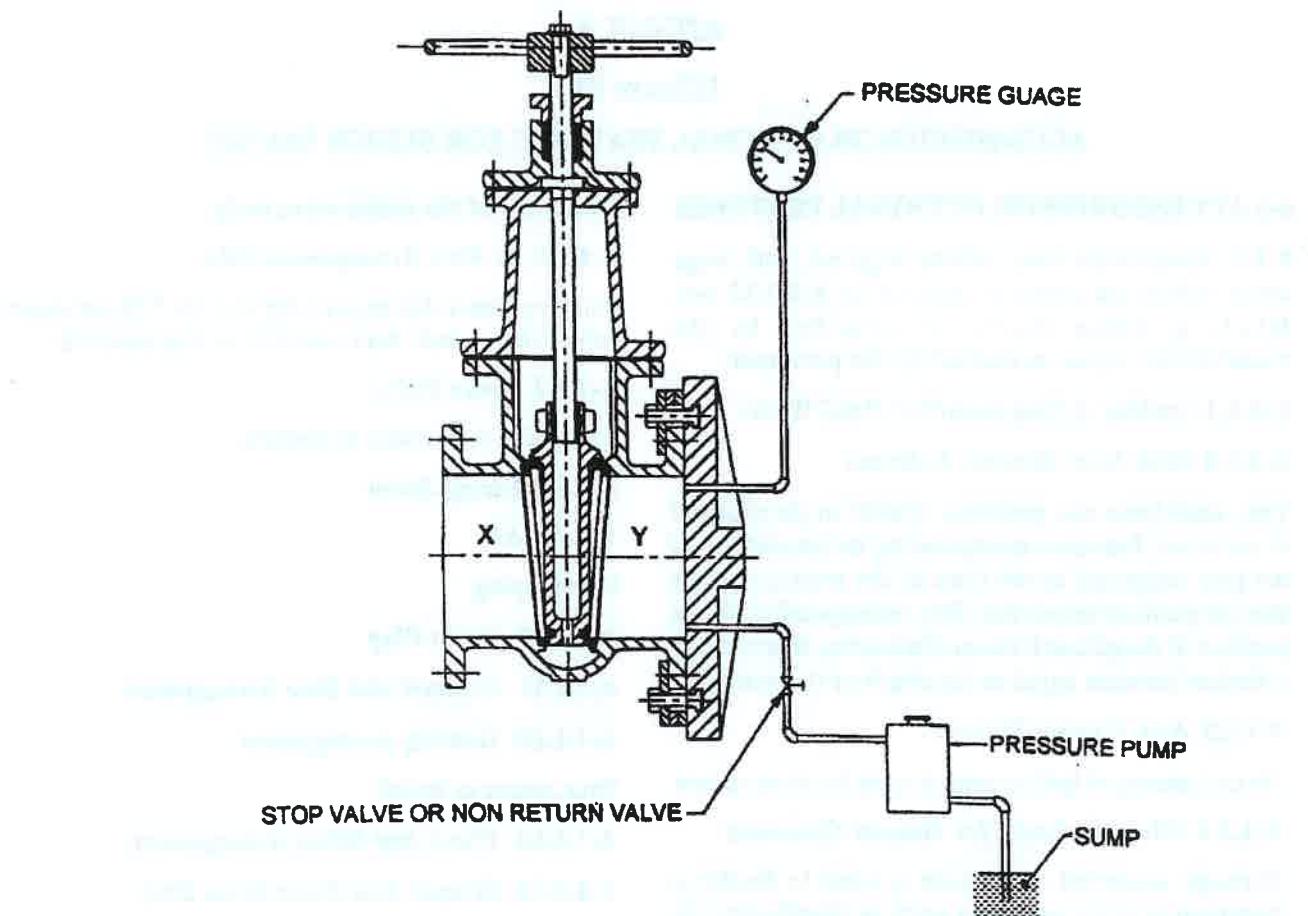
TYPICAL VALVE TESTING ARRANGEMENT FOR OPEN-END TEST
